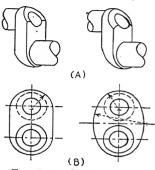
Crank arm details for noncounterweighted in-line and V-type aircraft-engine crankshafts. (A) Methods used in chamfering engine crankshaft arms. (B) Typical crank-arm contours. (From Angle. "Engine Dynamics and Crankshaft Design.")
